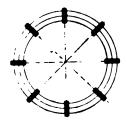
A System for Placing Lead Check Plates on the Labyrinth Seal TSTAT
